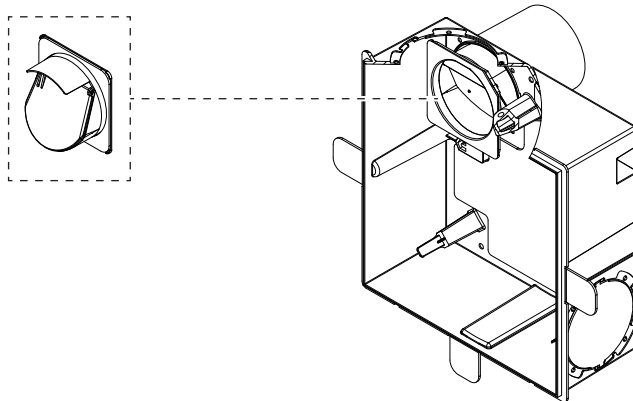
Installation position – non-return damper, surface-mounted/flush-mounted housing
